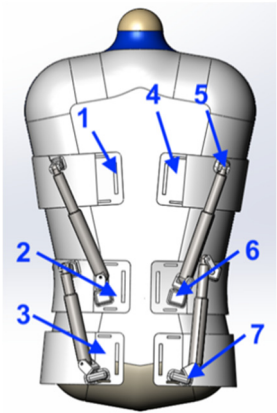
Front view of the spine exoskeleton showing actuator placement and attachment points
